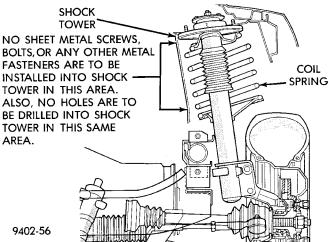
Shock Tower To Spring Minimum Clearance Area
